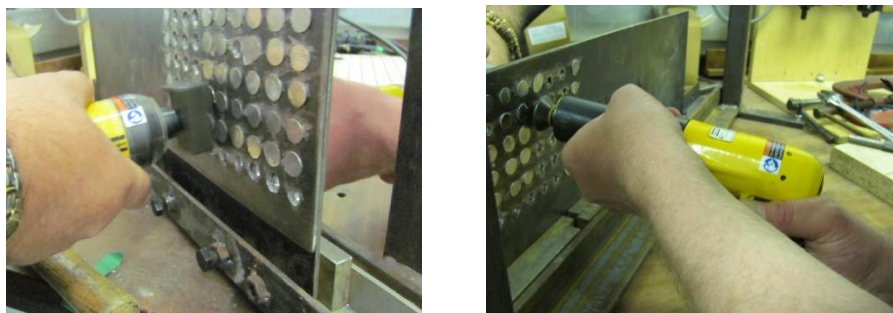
(a) Backing the rivets with the bucking bar (left) and (b) fitting rivets with a hammer
